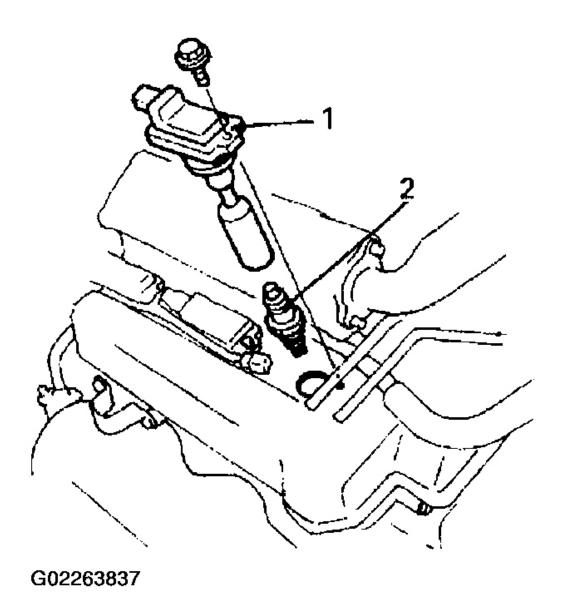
Removing All Ignition Coils & Spark Plugs Courtesy of SUZUKI OF AMERICA CORP.
